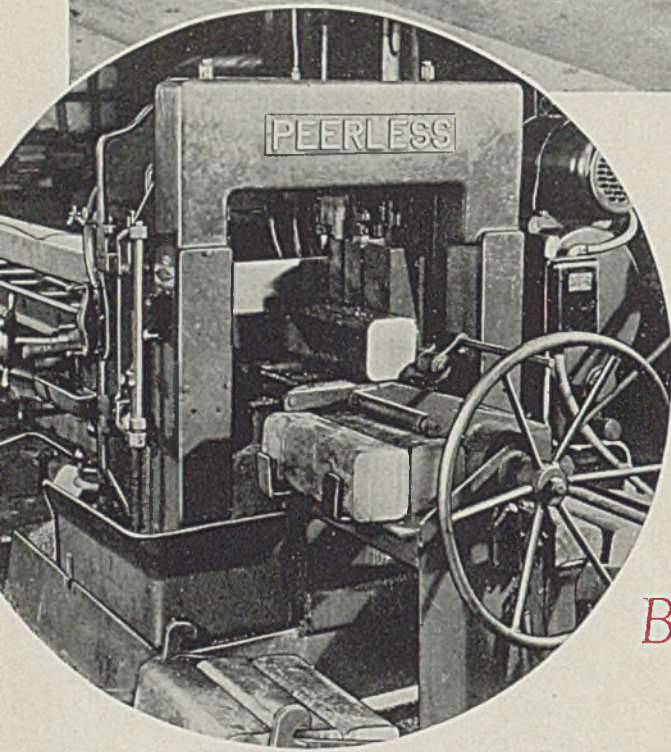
(Left)—Closeup of billet saw. Note advancing billet pushes cut piece off onto conveyor
